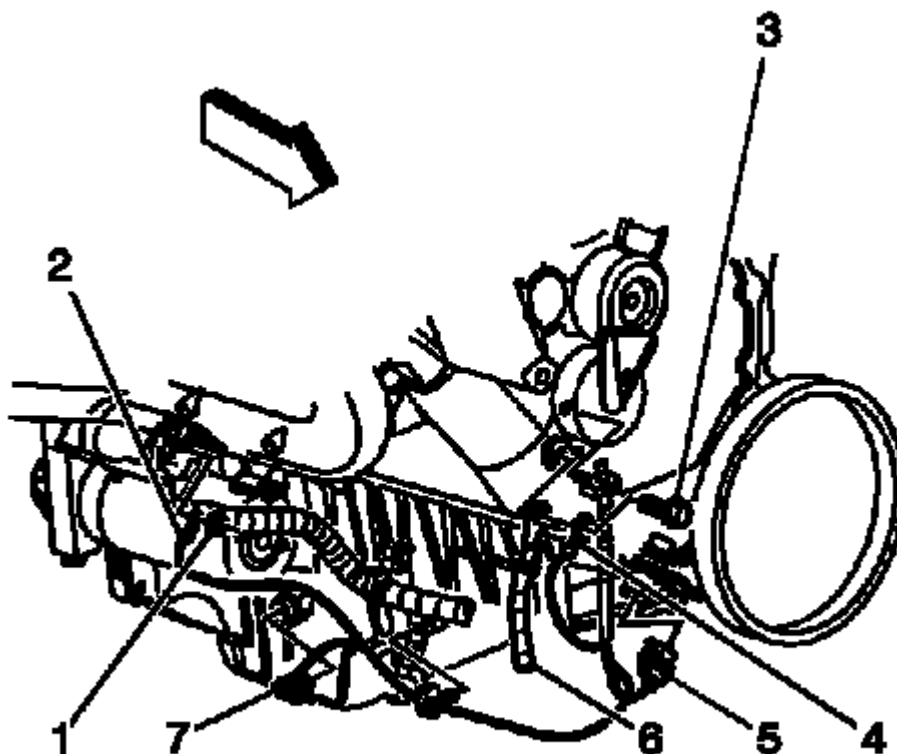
View Of Oil Level Sensor Electrical Connector, CKP Electrical Connector & Battery Ground Bolt
